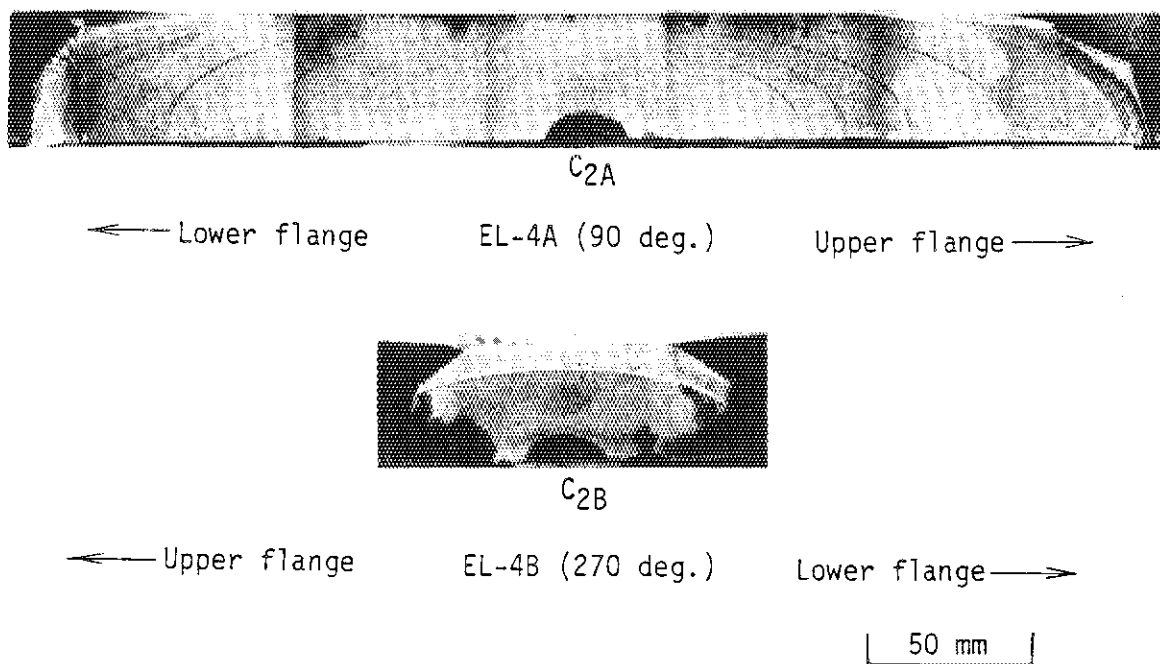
Fracture surface of EL-4 test pipe
